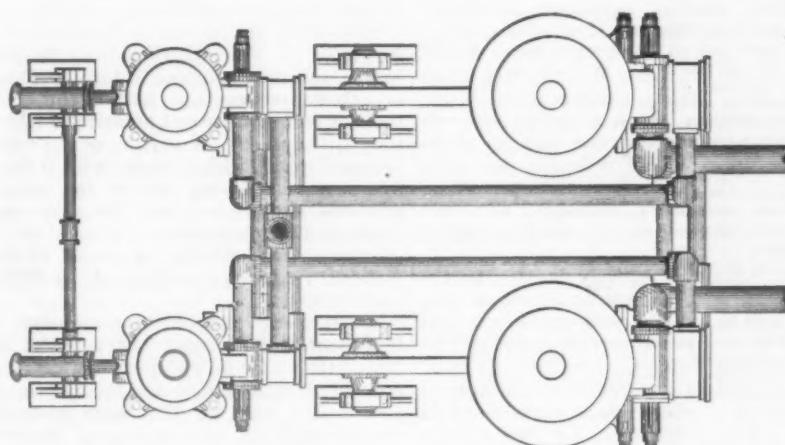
Plan View of Direct-Acting Steam Engine.
